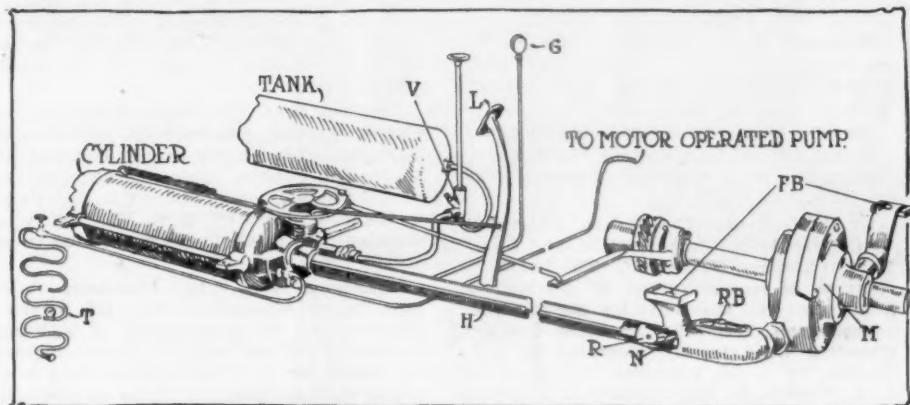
ARRANGEMENT OF PARTS OF Durno Engine Starter SHOWING TANK FOR HOLDING AIR AND TIRE INFLATING UNIT
